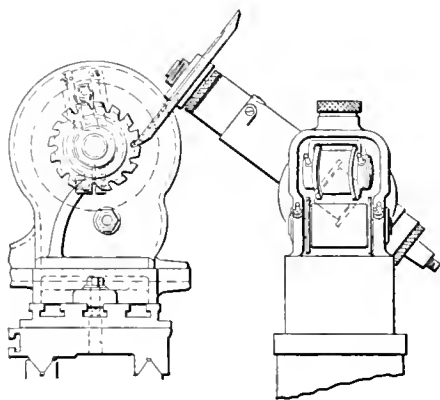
Arrangement of Machine for Grinding a Right-hand Hob.
